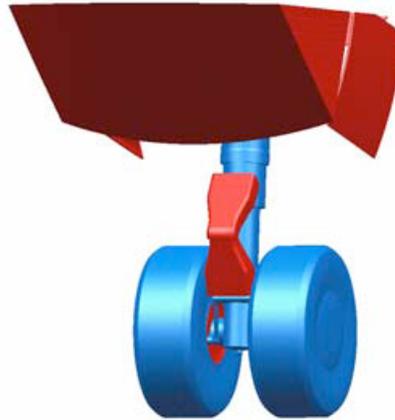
Nose Landing Gear Assembly with Spoiler Cover^[20]
